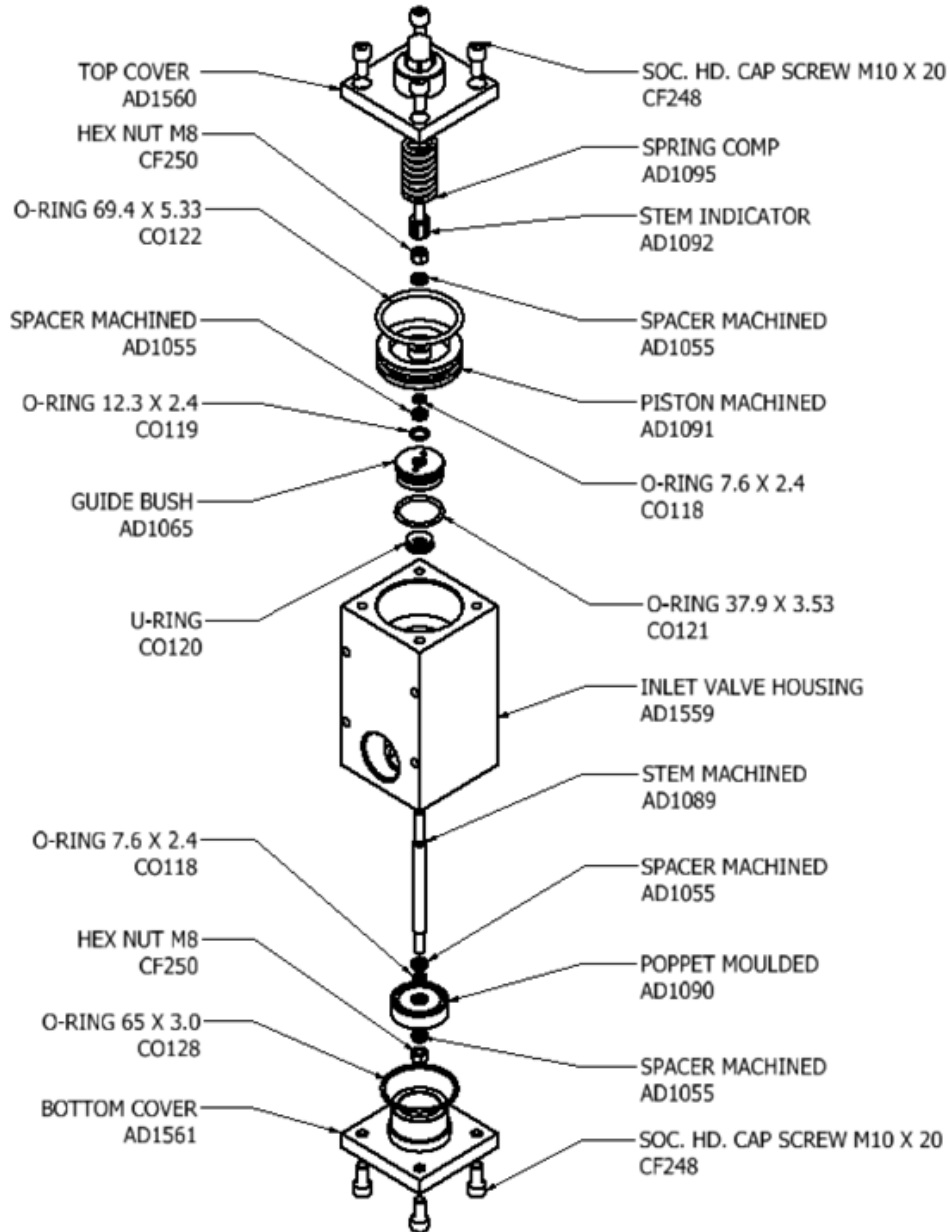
Exploded view of inlet valve assembly-Dryspell Plus model 200 & 250
